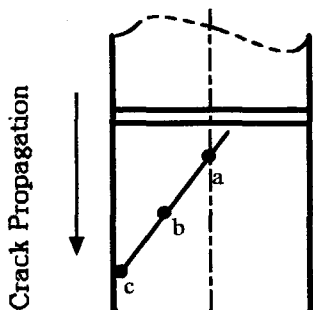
Picture Point of Fracture Surface on Shot-peening
